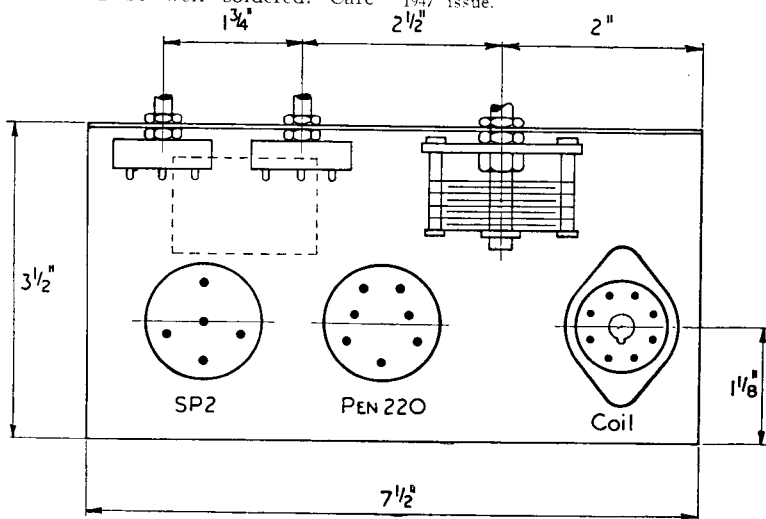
Top of chassis lay-out of the receiver when used as an O-V-I. Layout for receiver as a one-valver is the same except for the deletion of V2 holder
